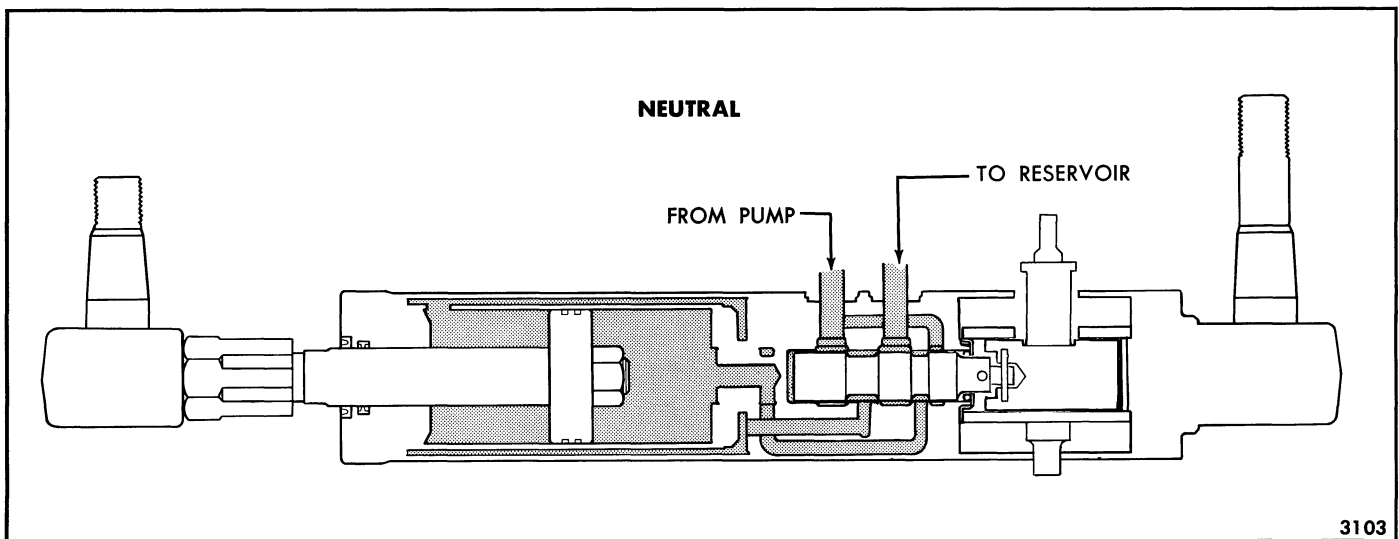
Flow Diagram—Oil Flow with Control Valve in Straight-Ahead Driving Position
